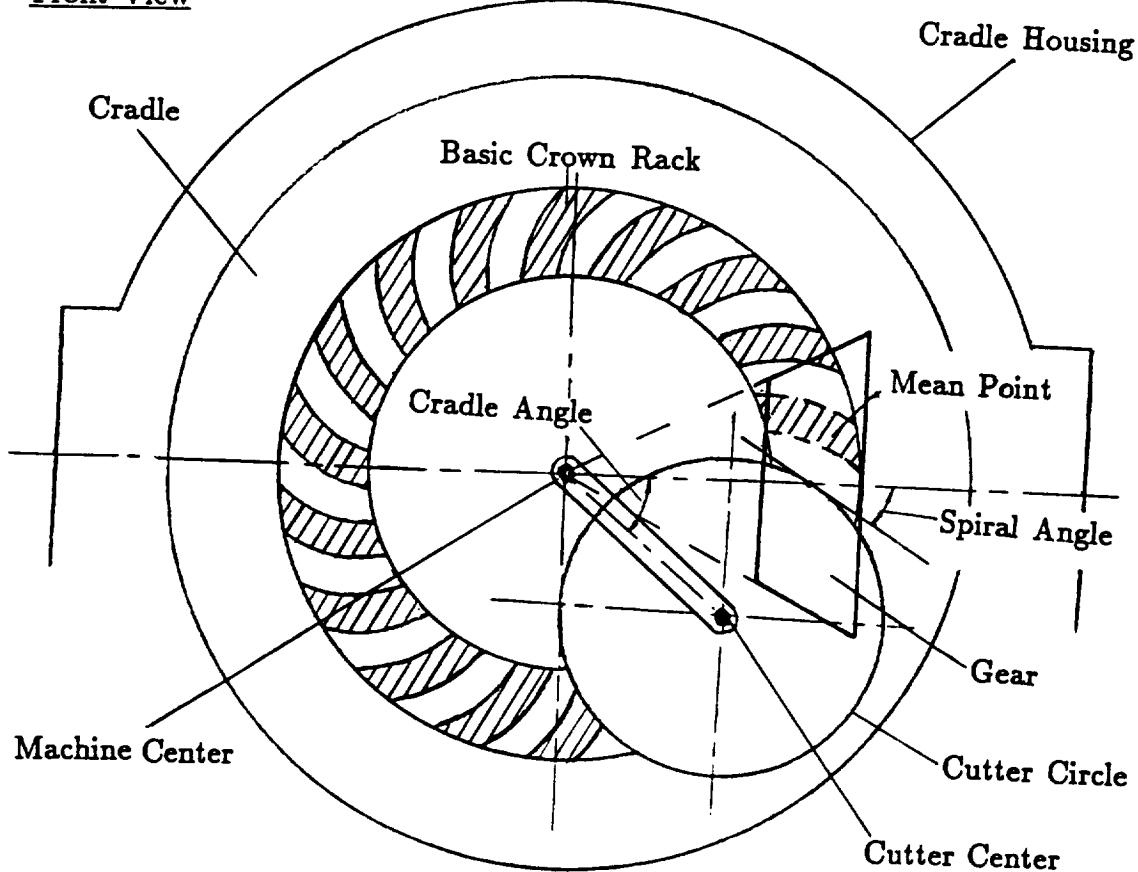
Cutting spiral gear teeth on the basic crown rack.
